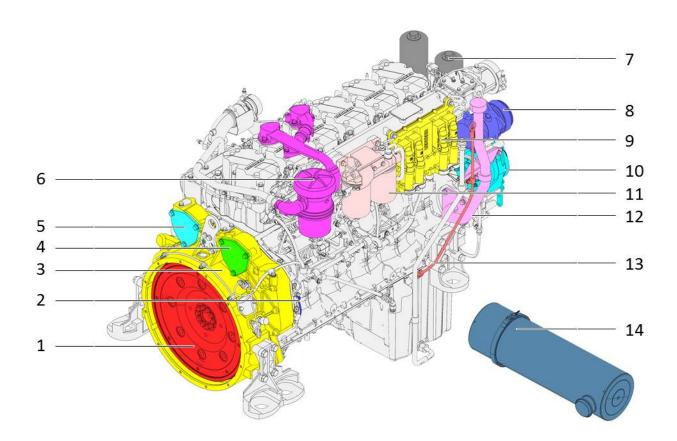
Parts of the diesel engine D936 A7-04 / view from the right
